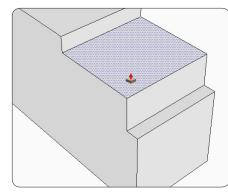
Using the Push/Pull Tool to shape the rabbet.
